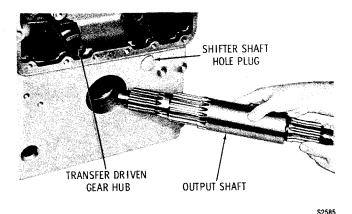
Installing output shaft (-1 models with one-piece shaft, with outputs at front and rear)
